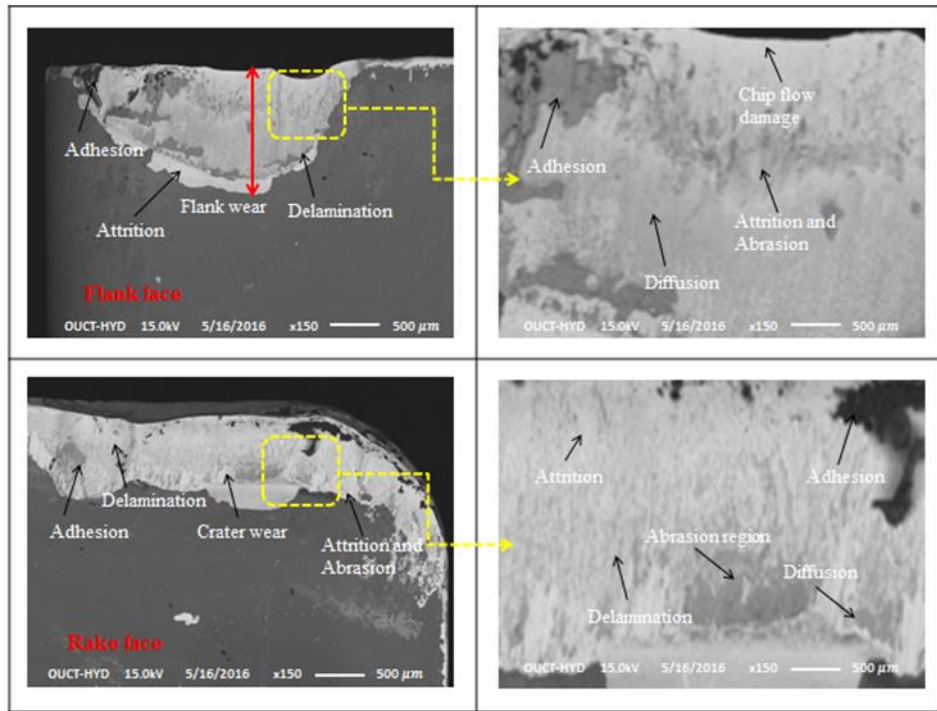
SEM images of cutting tool in MQL machining condition at cutting speed 100 m/min
